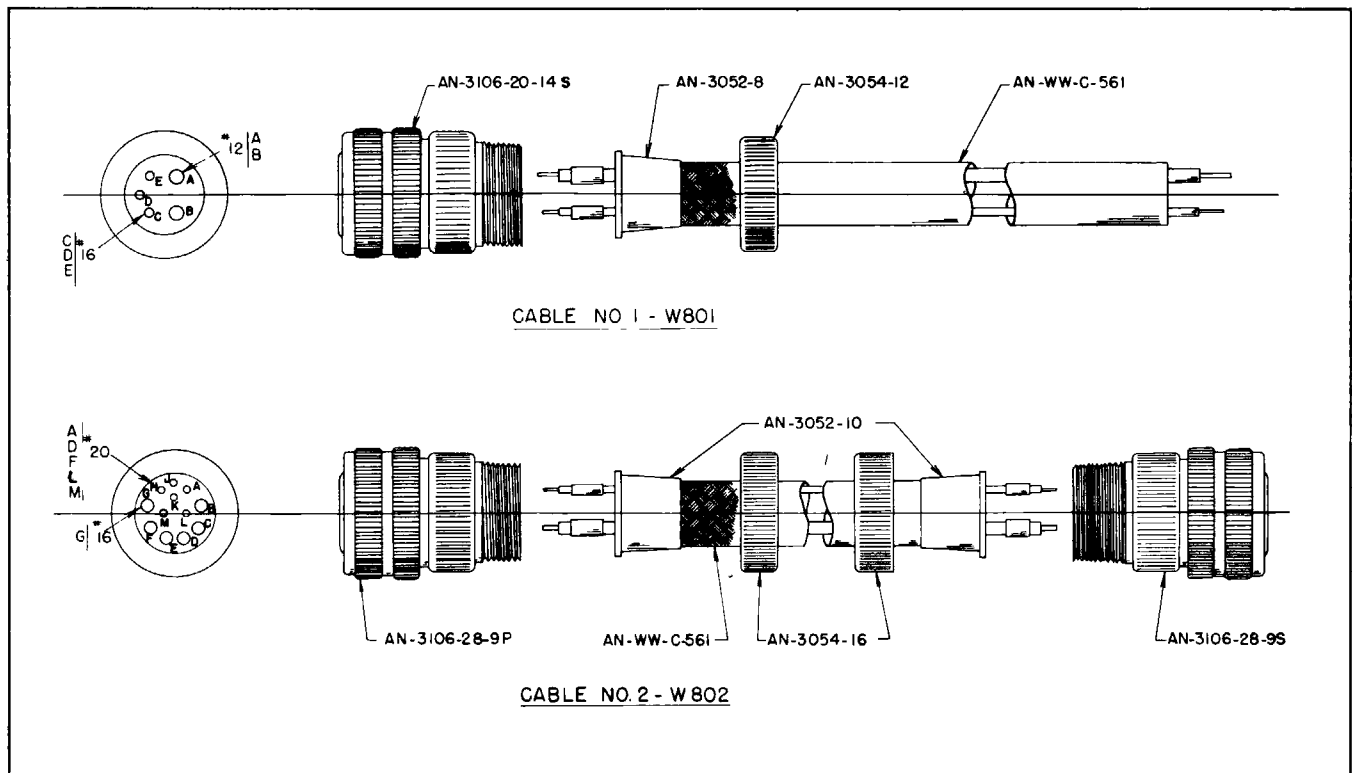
Cable Assembly—Cables No. 1 and 2
